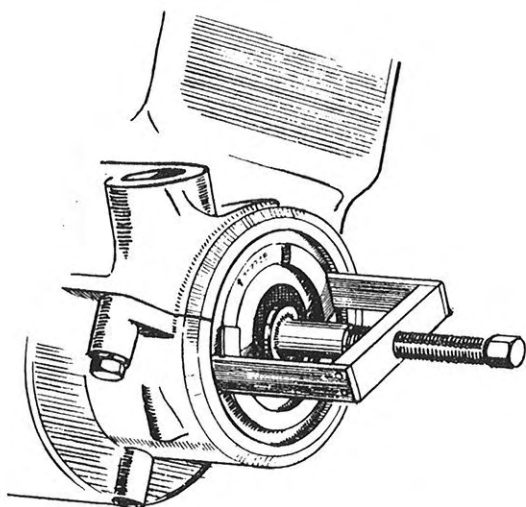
Removal of outer cover from distributor gear case by means of tool Saab 93-104
